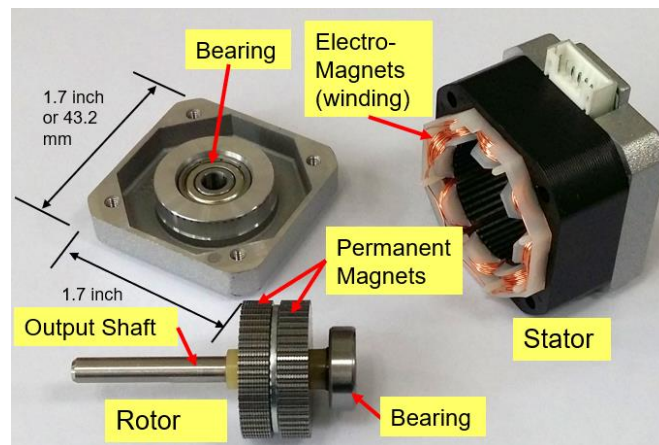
Disassembled NEMA-17 size bipolar stepper motor
